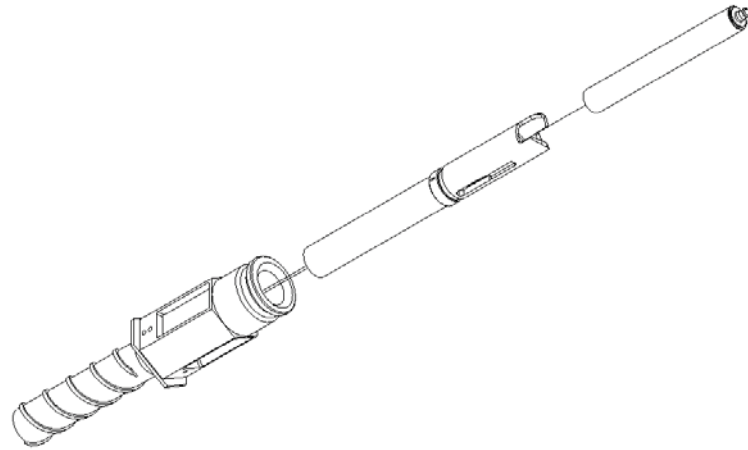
Picture of the drill bit in an exploded drawing view, Auger, Breakoff Tube and JPL Sample Tube Visible
